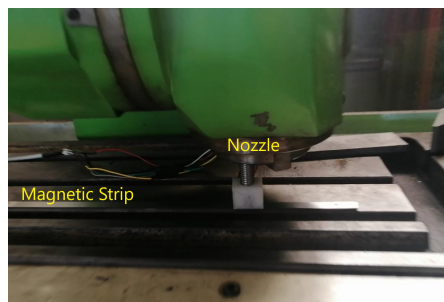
Position Sensor Test Bench: The figure shows the position sensor installed on the CNC machine's nozzle and the magnetic strip installed on the movable plate.
